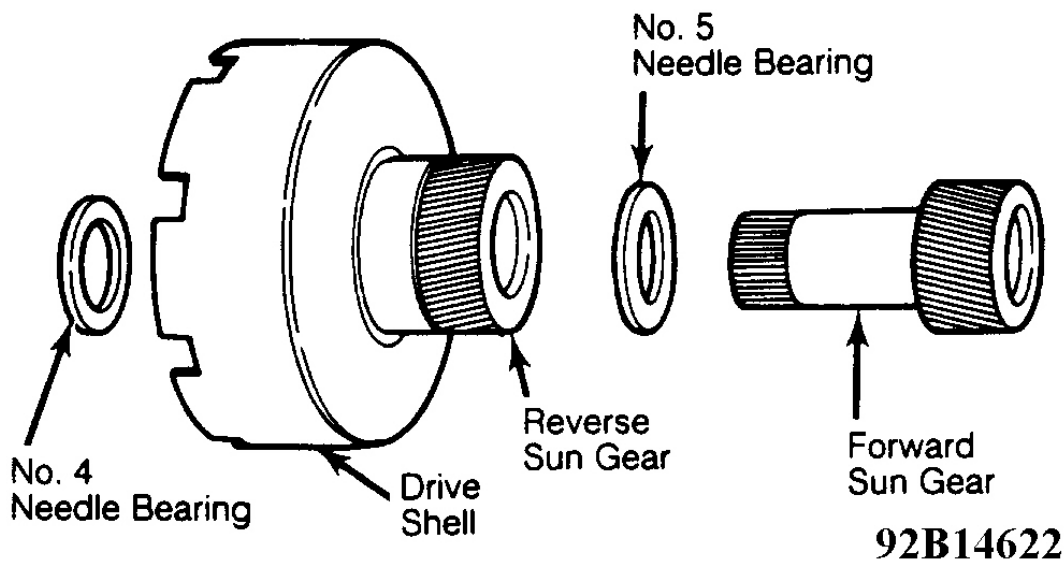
Exploded View of Sun Gear & Drive Shell.
